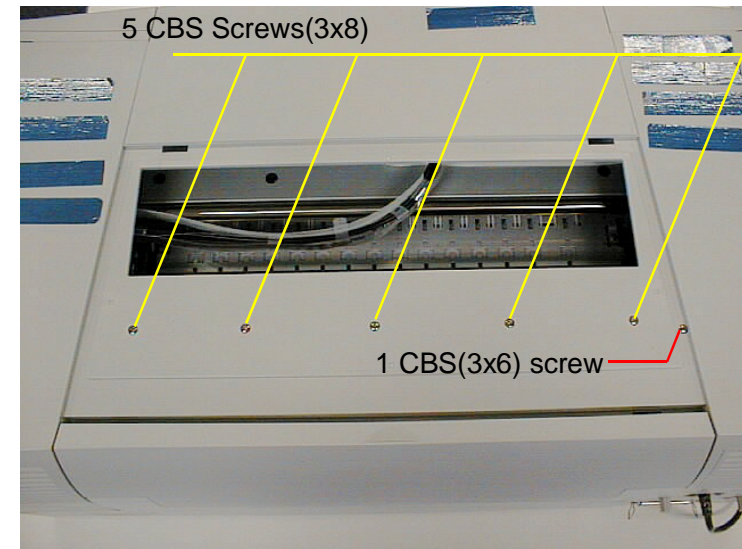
Positions of fixing screws for Housing Upper(1)
